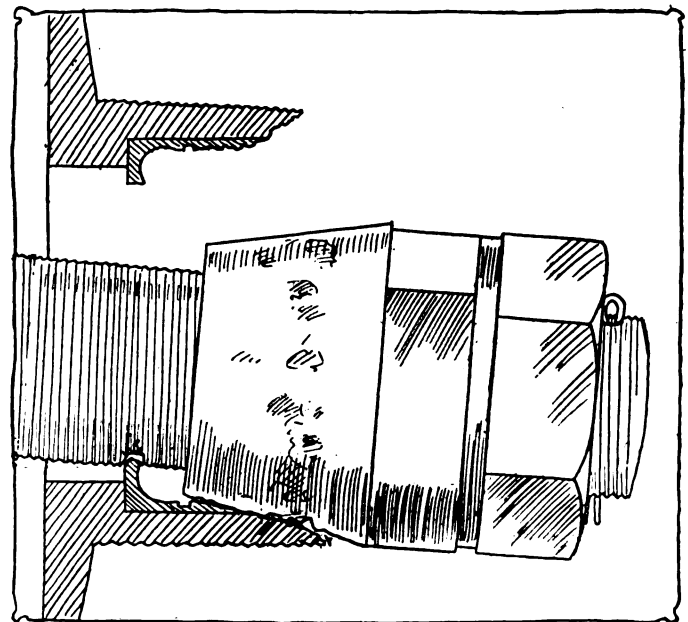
Condition bearing may reach if not adjusted. Balls have dropped out and wheel is rusting on hub ball race cutting into wheel spindle. This condition actually occurred on a car brought to the attention of The Automobile recently
